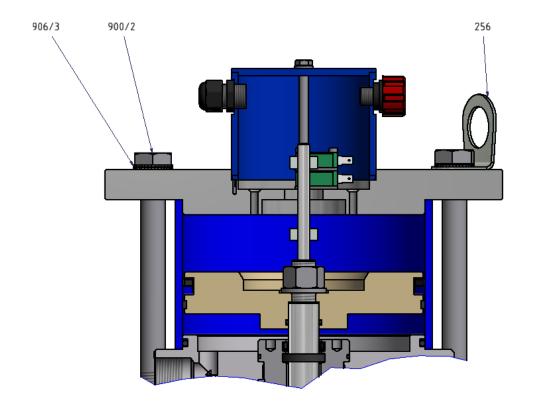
Wear part, spare part kit for valve (V1) and Valve (V2)
